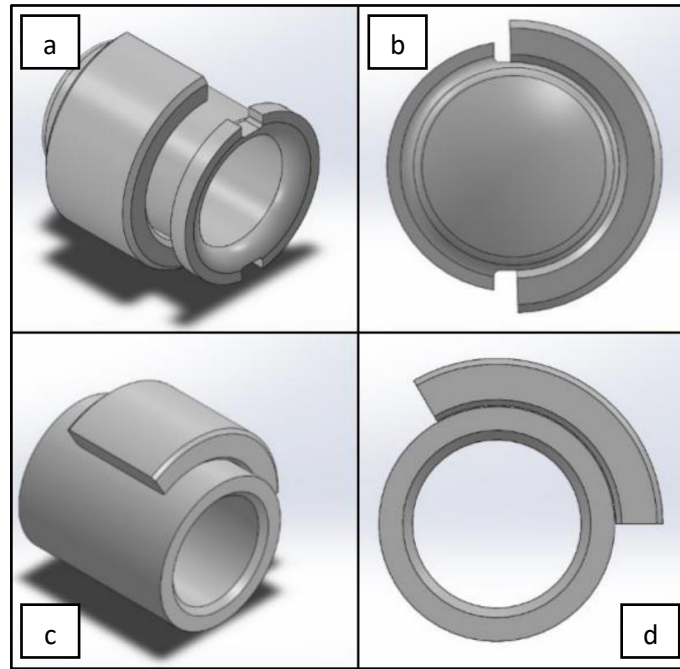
CAD renders of: stabiliser roll bearing sleeve (a) and bushing (b), sink roll bearing sleeve (c) and bushing (d). Reproduced from (Faulkner, 2020).
